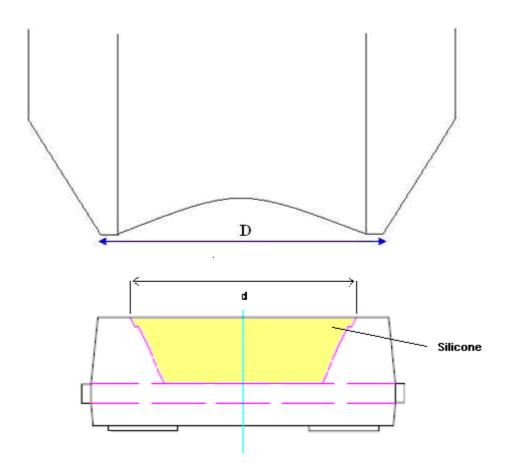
Pick & place nozzle diameter (D) should be larger than the opening (d)
